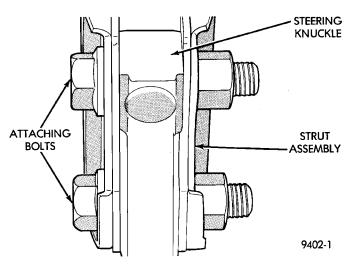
Remove Steering Knuckle To Strut Attaching Bolts
